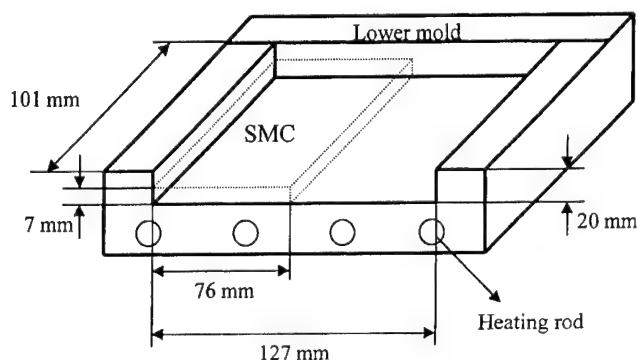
Dimension and location of the initial SMC charge on the lower mold.
